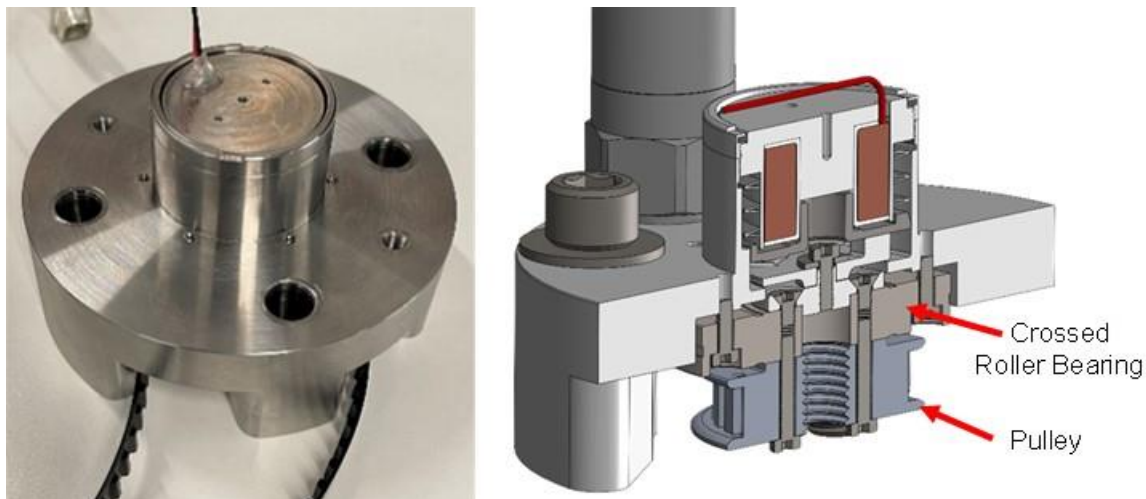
Photo and CAD of the Dynamic Vibration Testing Fixture
